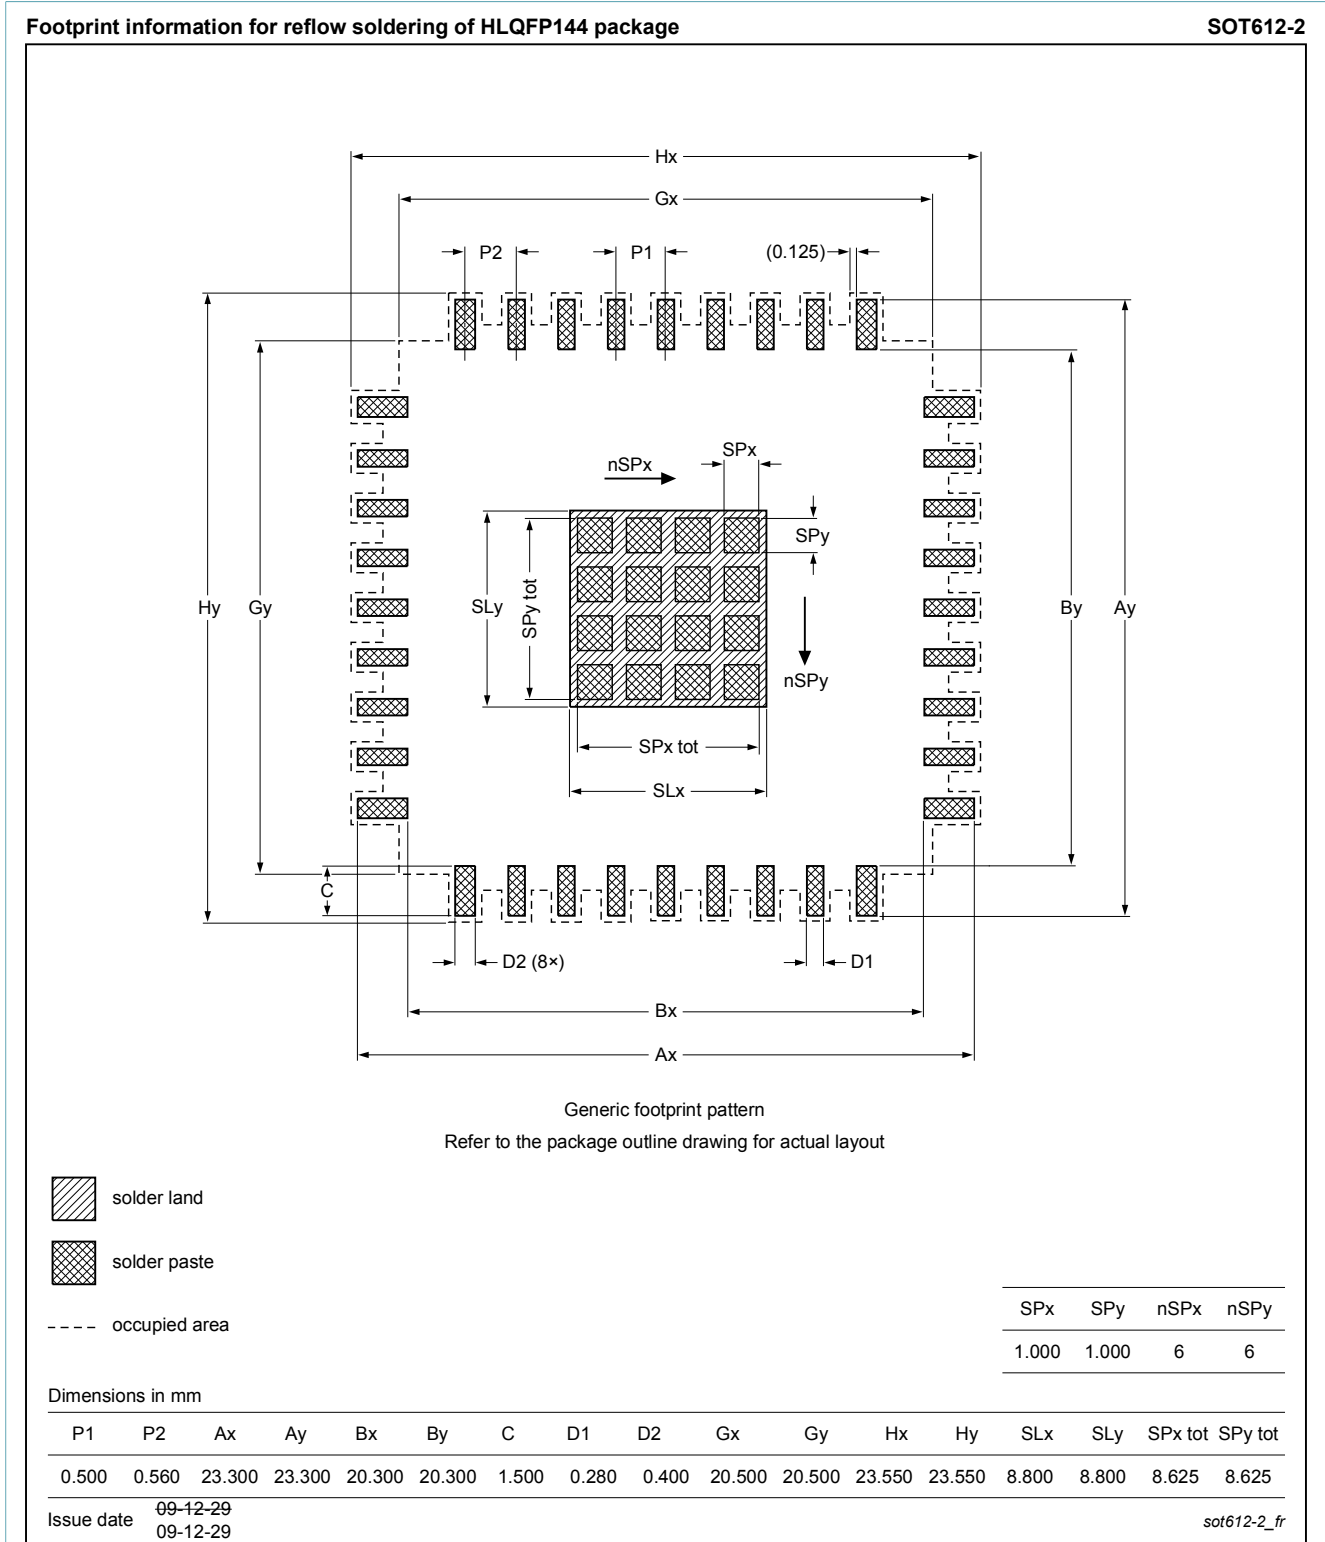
Reflow soldering footprint for HLQFP144 (SOT612-2)
